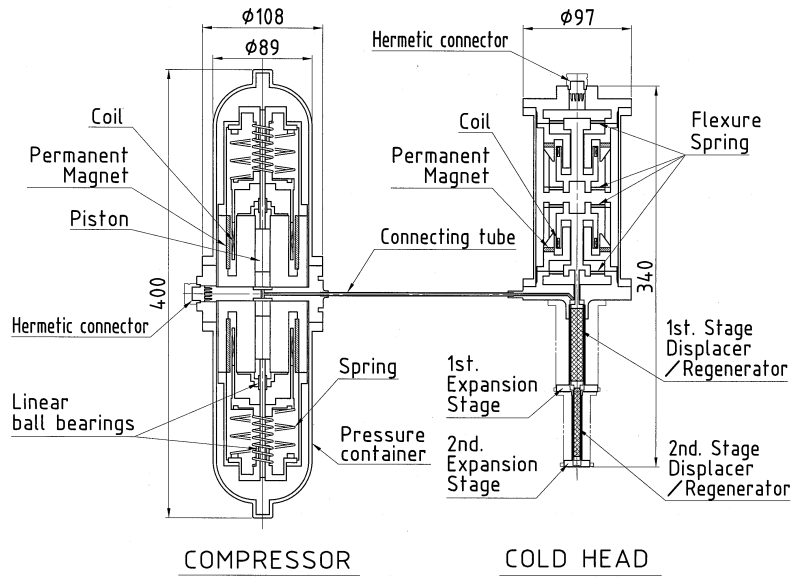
Cross-sectional view of the upgraded 2ST cooler
